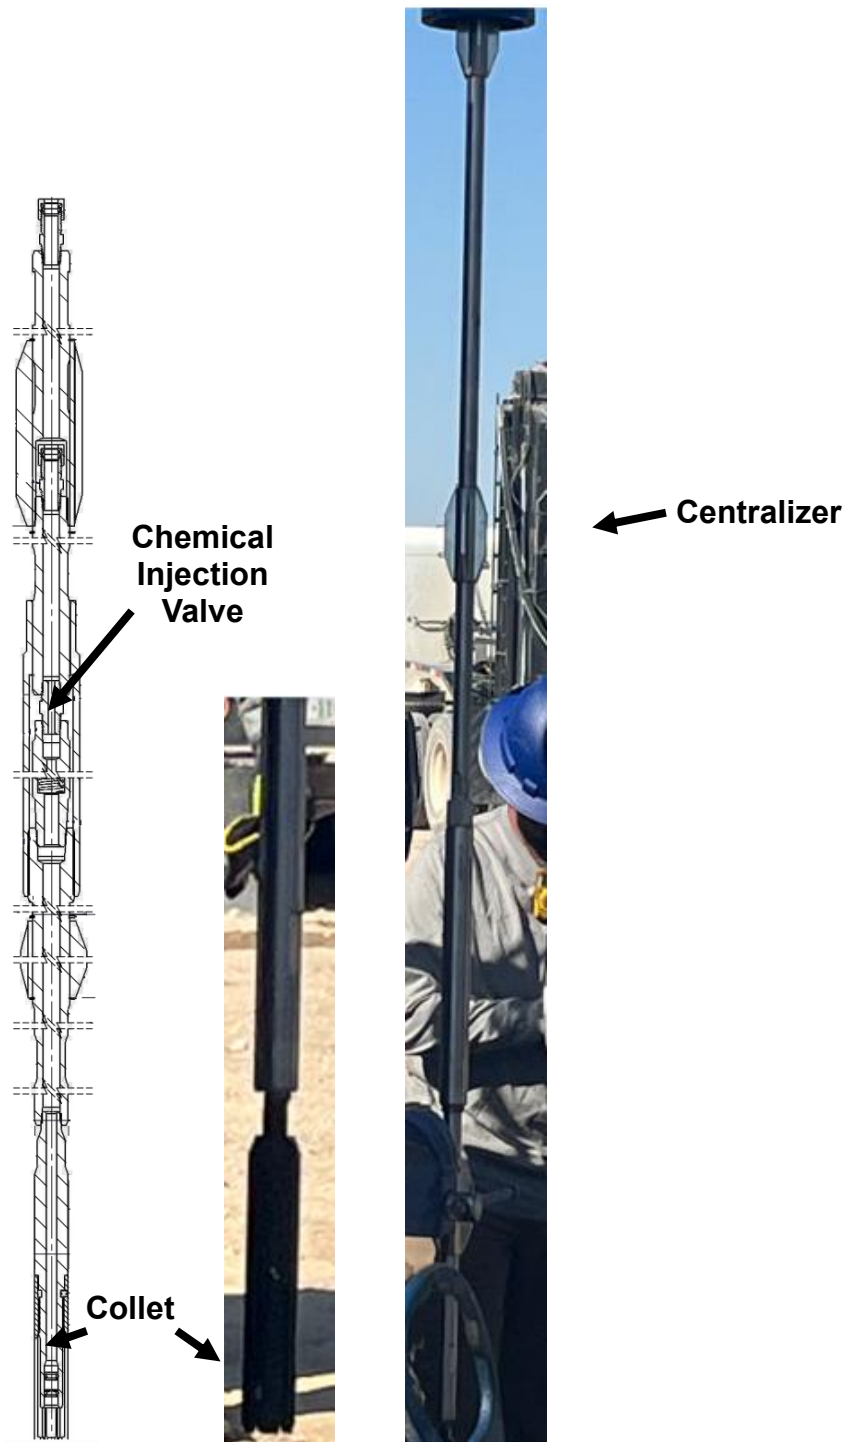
Upper assembly, run with capillary unit. The centralizers help align the tool so the collet can enter the lower assembly. The collet latches onto the stinger in the lower assembly and provides a seal.
